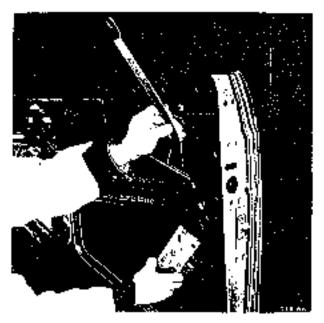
Removing Convertible Coupe Door Latch Assembly (1940-42 Models)
